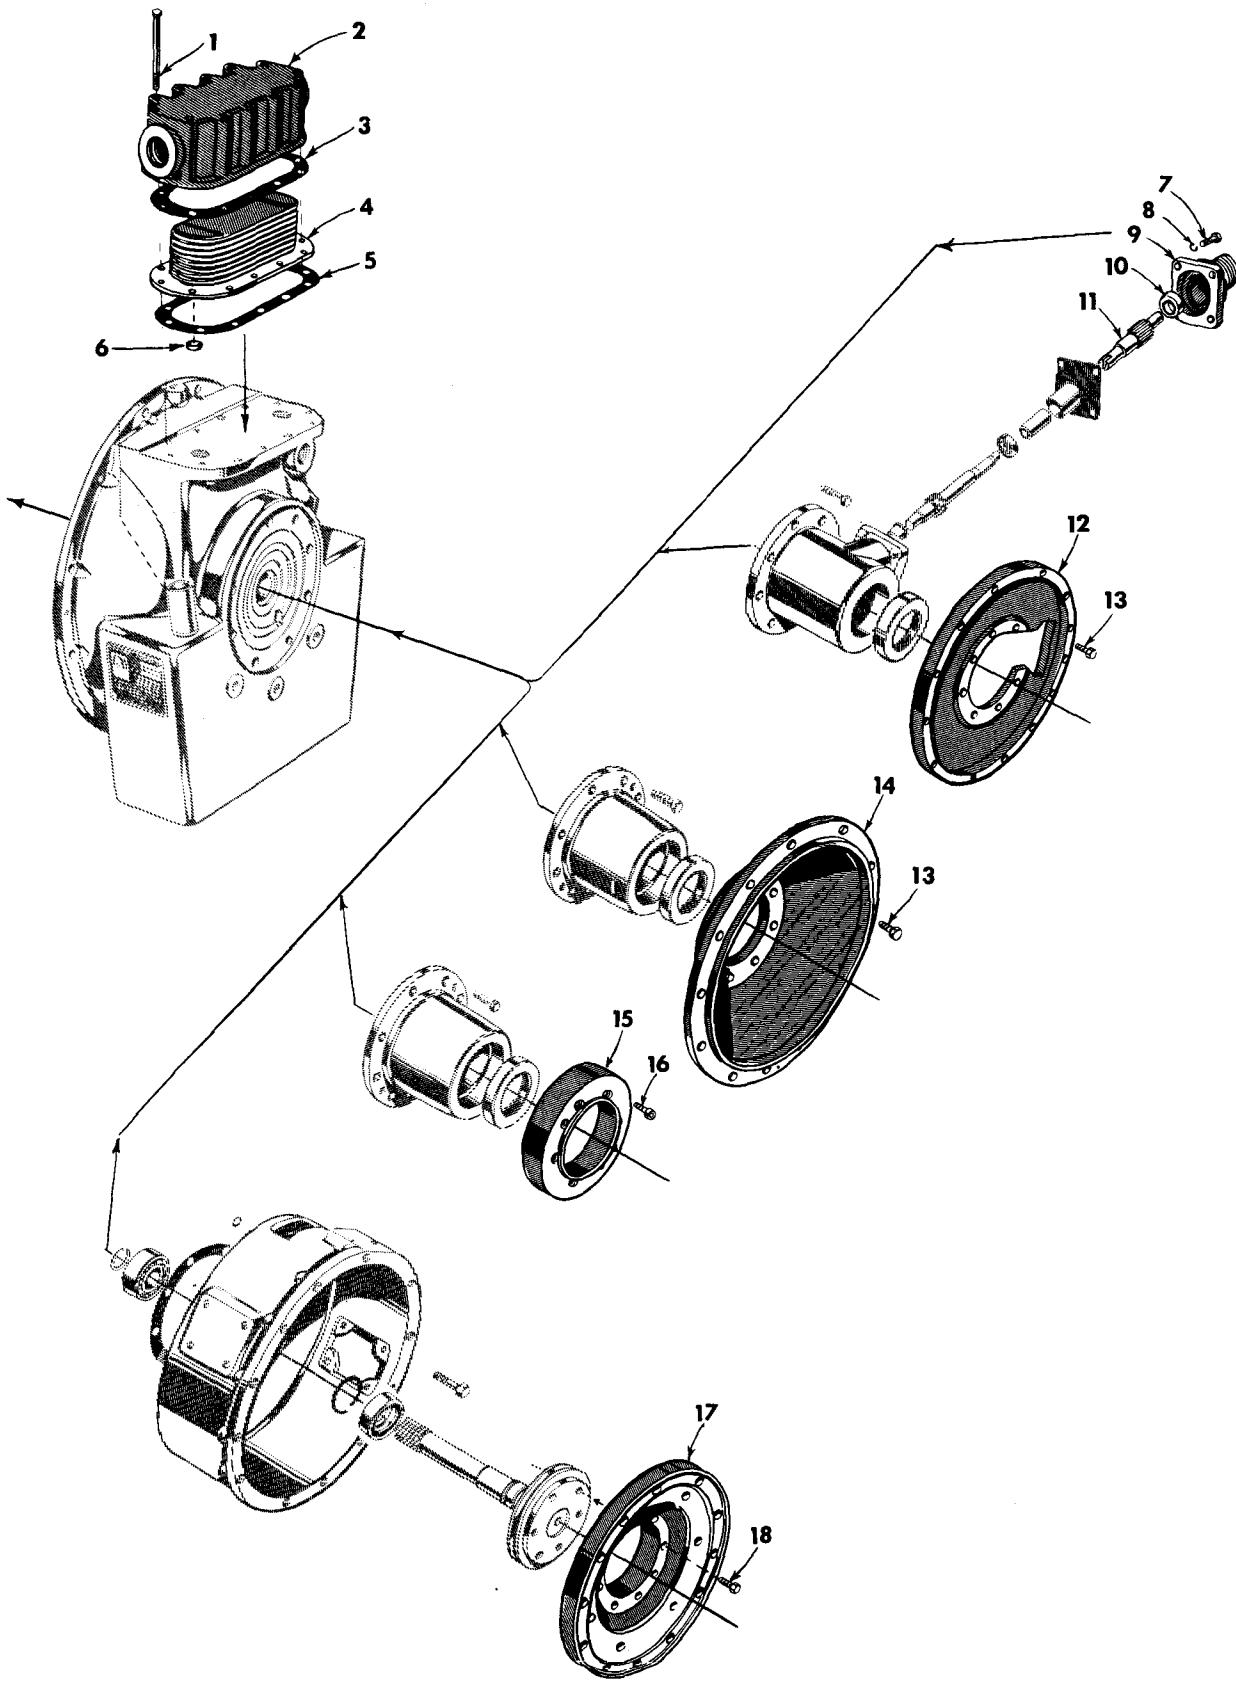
SERIES OIL COOLER OPTIONS, CABLE DRIVE ADAPTER OPTION, REAR DISCONNECT CLUTCH ADAPTER OPTION, AND MOUNTING PLATE OPTIONS, EXPLODED VIEW
